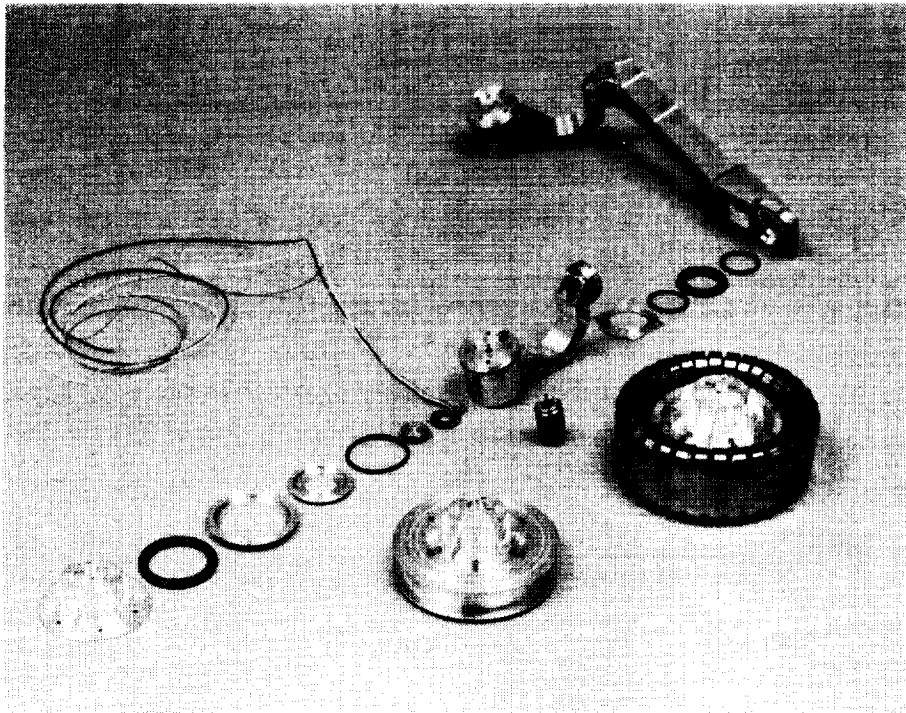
Photograph of the bogie assembly showing all of the parts for one wheel drive mechanism.
